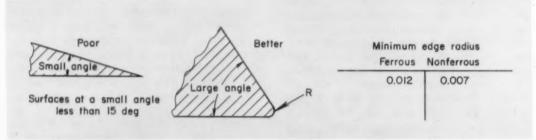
Recommended edge design. Sharp angles should be avoided.
